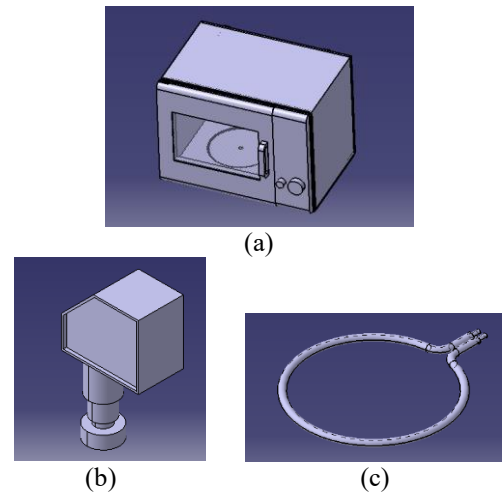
Component of (a) microwave, (b) ultrasonic and (c) heating rod.
